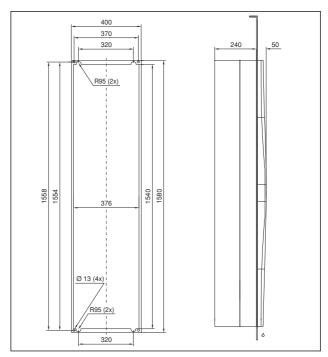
SK 3328.xxx/SK 3329.xxx full internal mounting
